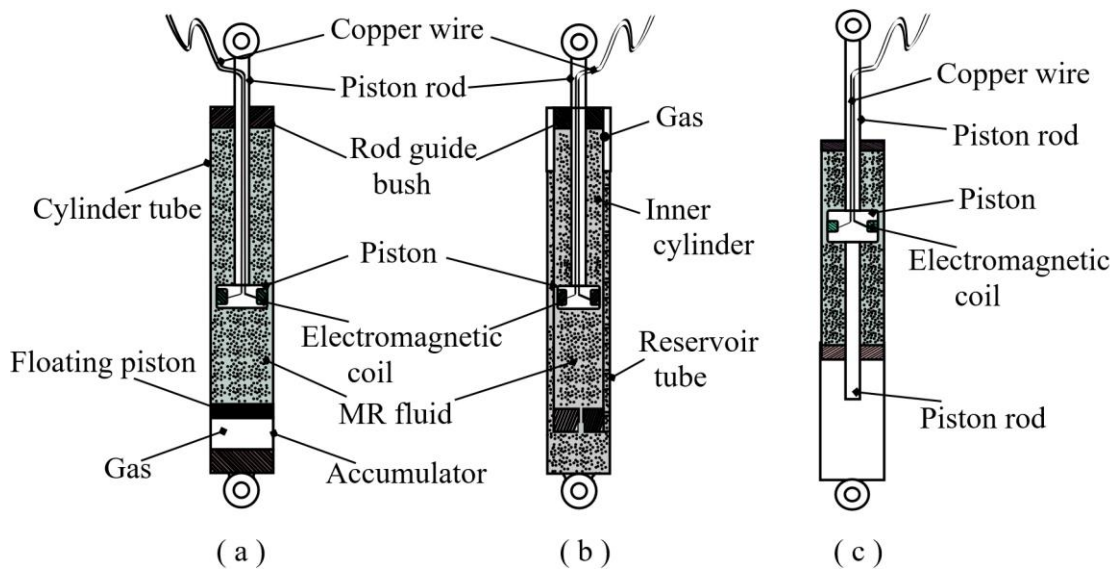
(a) Single tube MR damper, (b) Twin tube MR damper and (c) Twin rod MR damper (Goldasz and Sapiński 2015)
